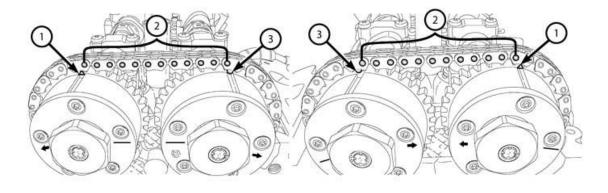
Chain Pins, Exhaust Cam Phaser Triangle Marking & Circle Marking
